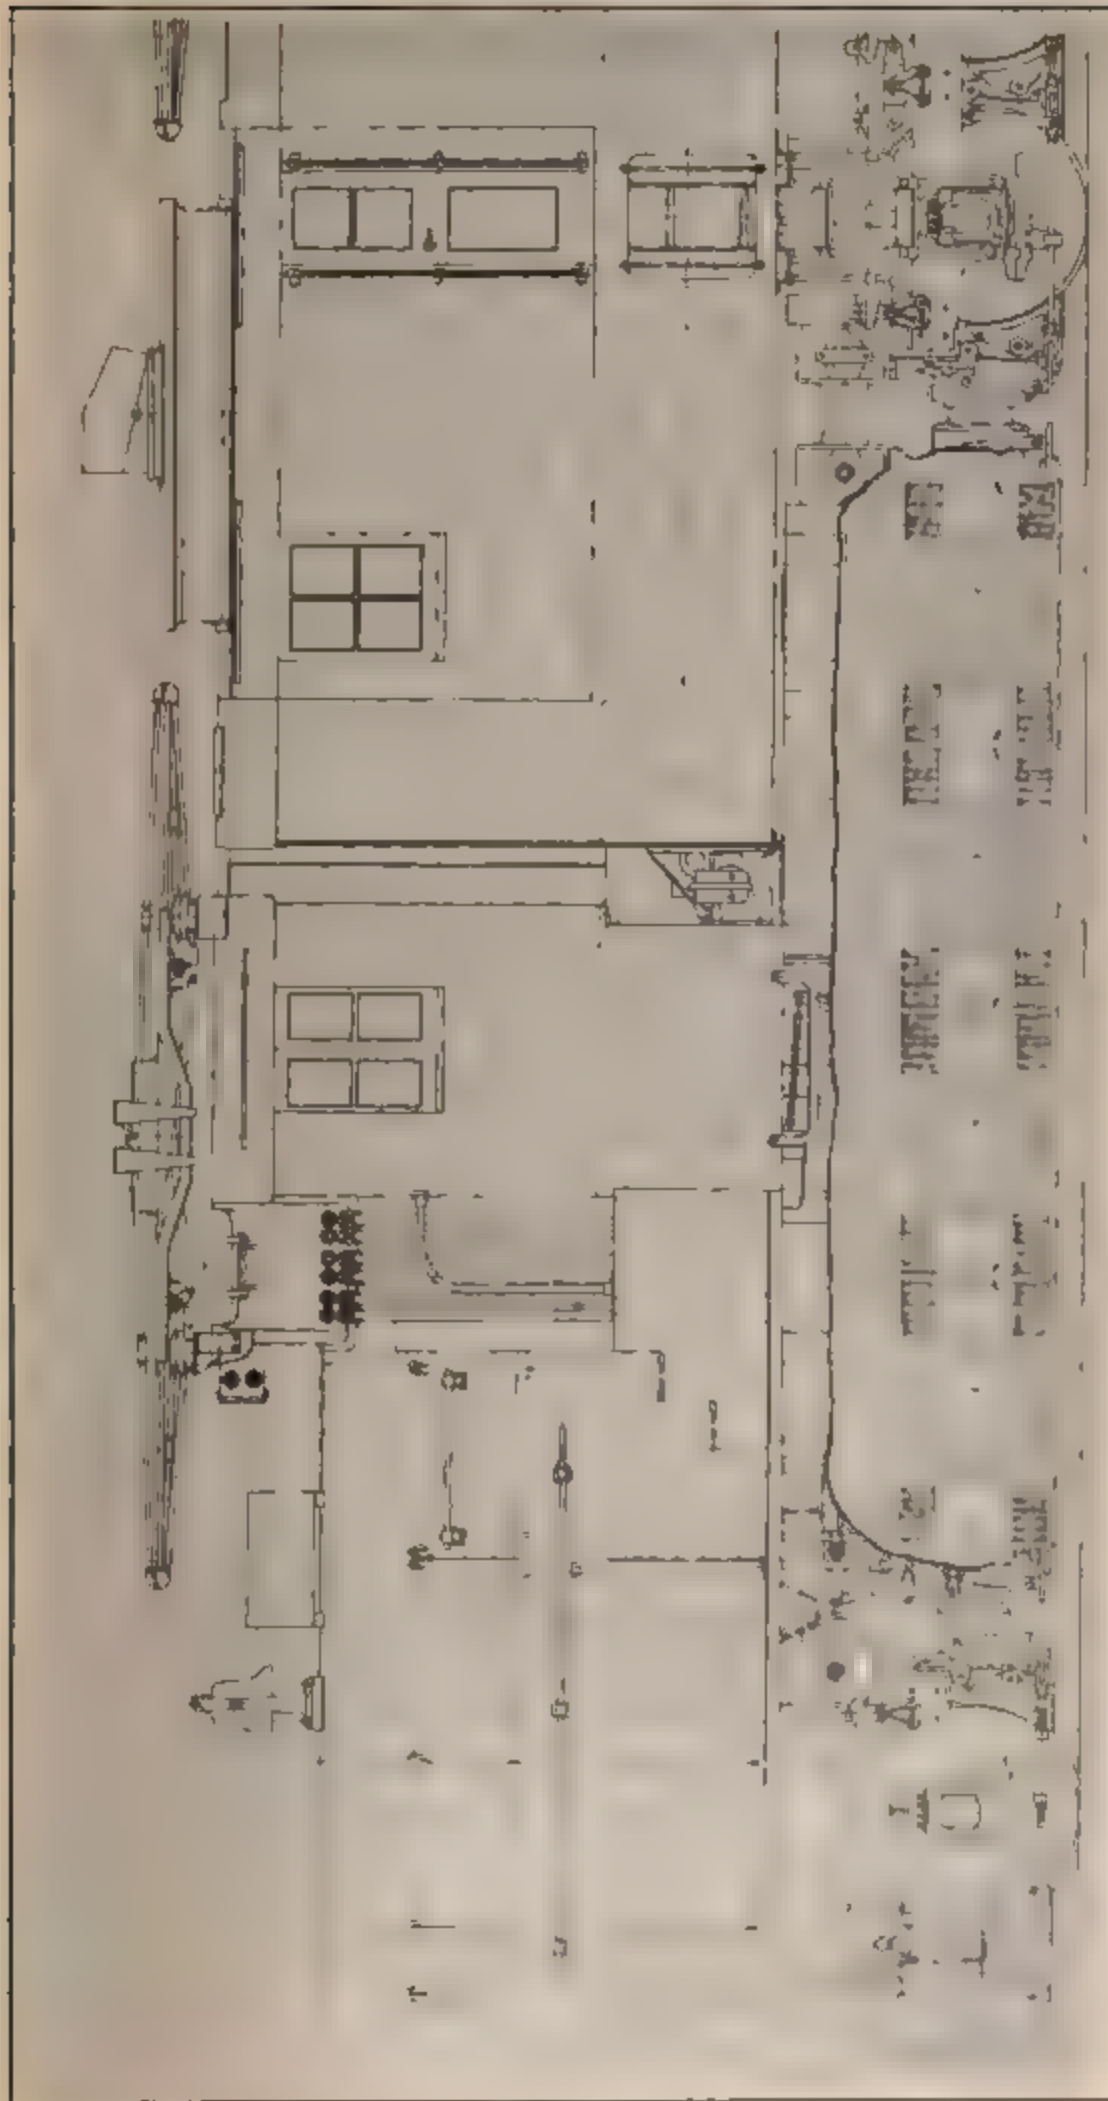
Sectional view of General-Electric locomotive for C., M. & St. P. Railroad, showing construction of gearless motors.
